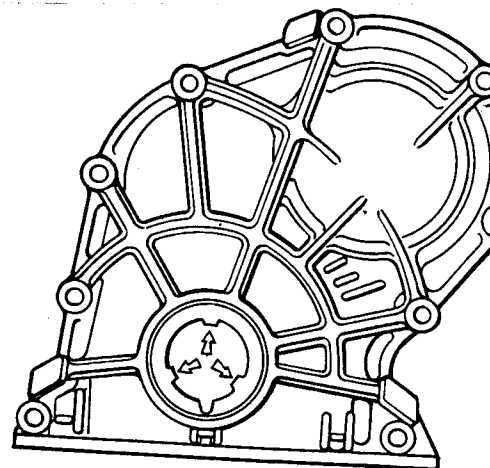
Camshaft Drive Cover. Arrows Show for Aligning Cover with Crankshaft Pulley
